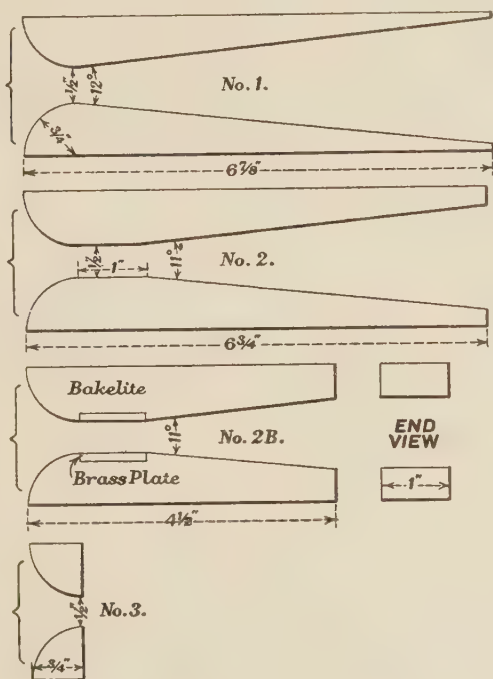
DIMENSIONS OF NOZZLE BLOCKS
